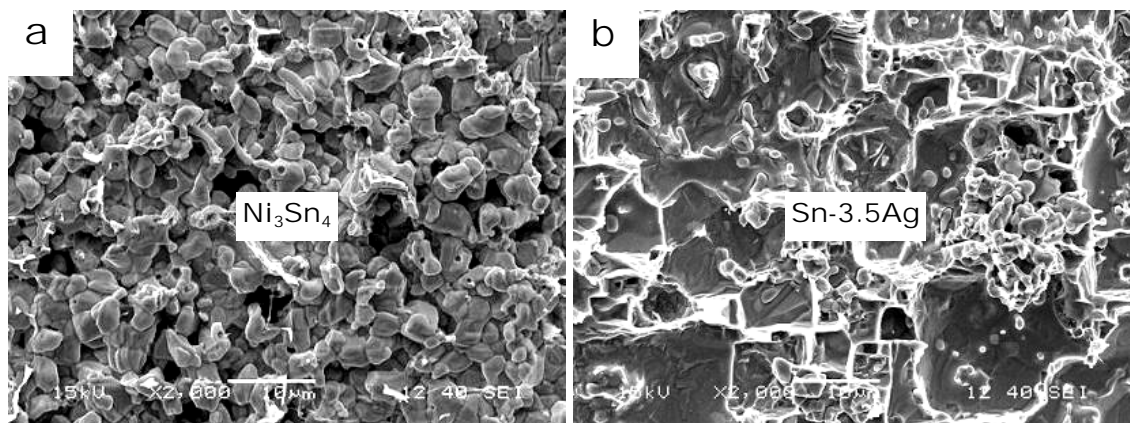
Fracture surfaces of the electroless Ni-P/Sn-3.5Ag solder joint aged at 160 °C for 100 h with 3×10^3 A/cm² current density: (a) Anode side and (b) cathode side.
